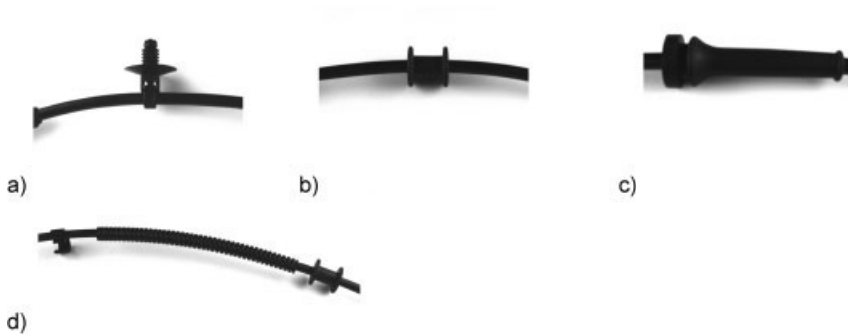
Fixing parts to attach the sensor cable to the car body: a) cable clip; b) grommet; c) grommet; d) expansion bellows of plastic for cable protection
